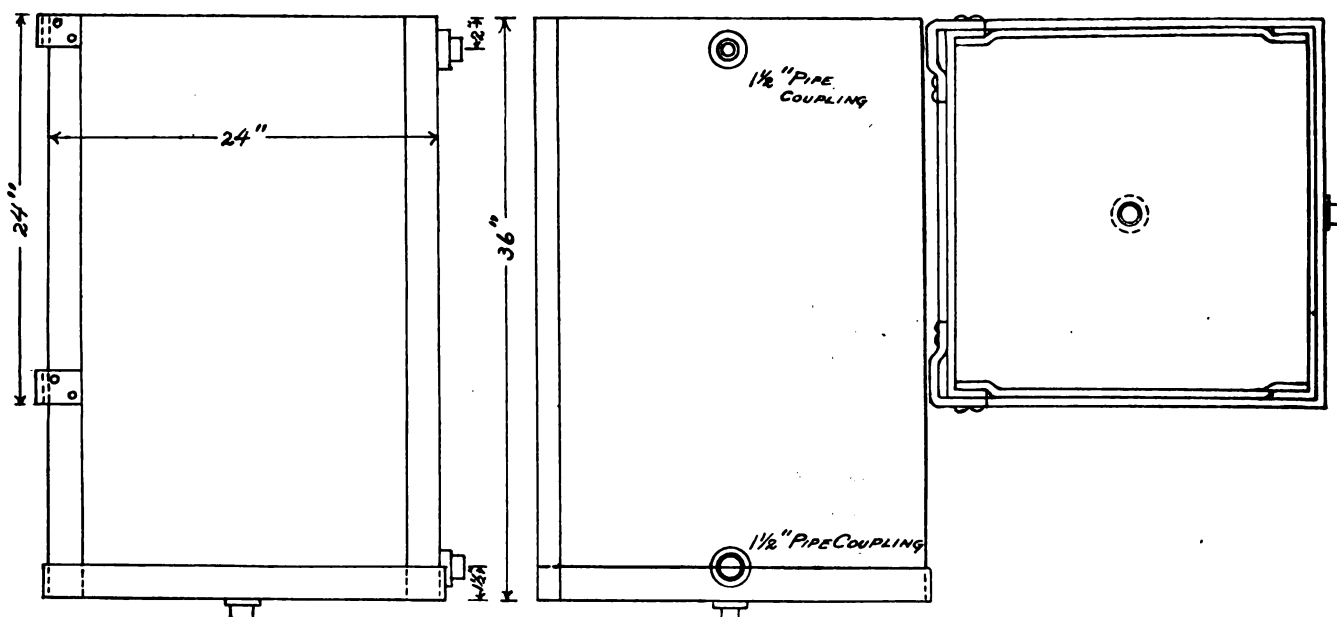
A SIDE ELEVATION, AN END VIEW AND A TOP VIEW OF THE TANK ITSELF WITHOUT OTHER FIXTURES
